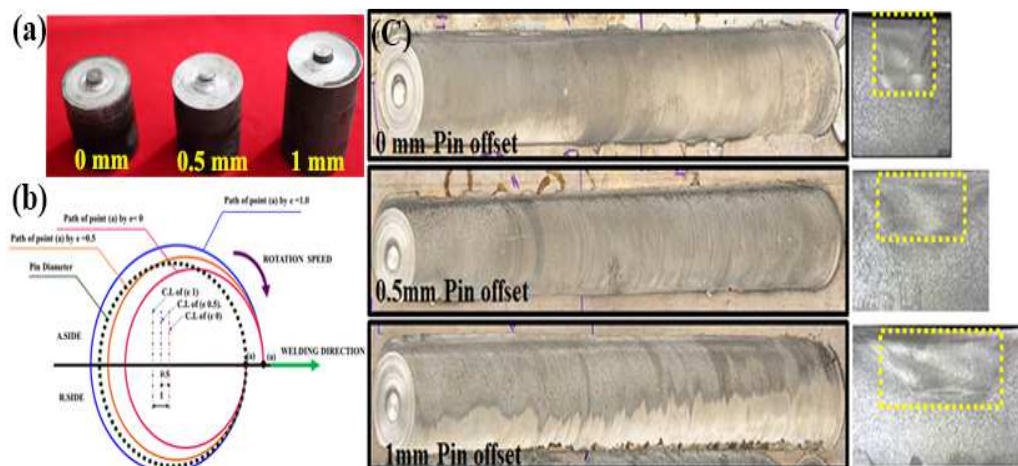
(a) Eccentric Tool (b) Schematic Eccentric Pin Flow Path (c) Processed Specimen and Macrographs
